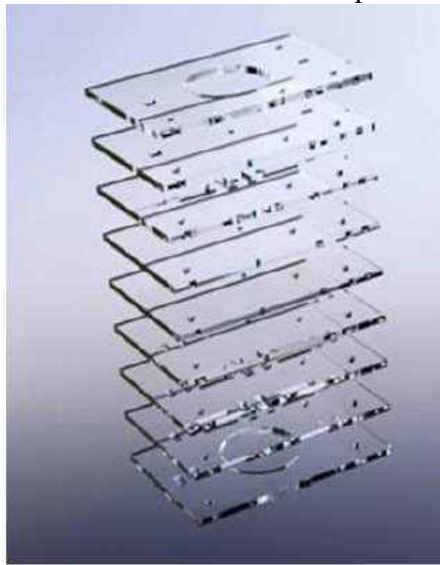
Exploded view of the eight layers forming a unit showed prior to assembly and bonding.
